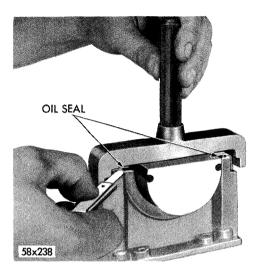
Trimming Rear Main Bearing Lower Oil Seal
